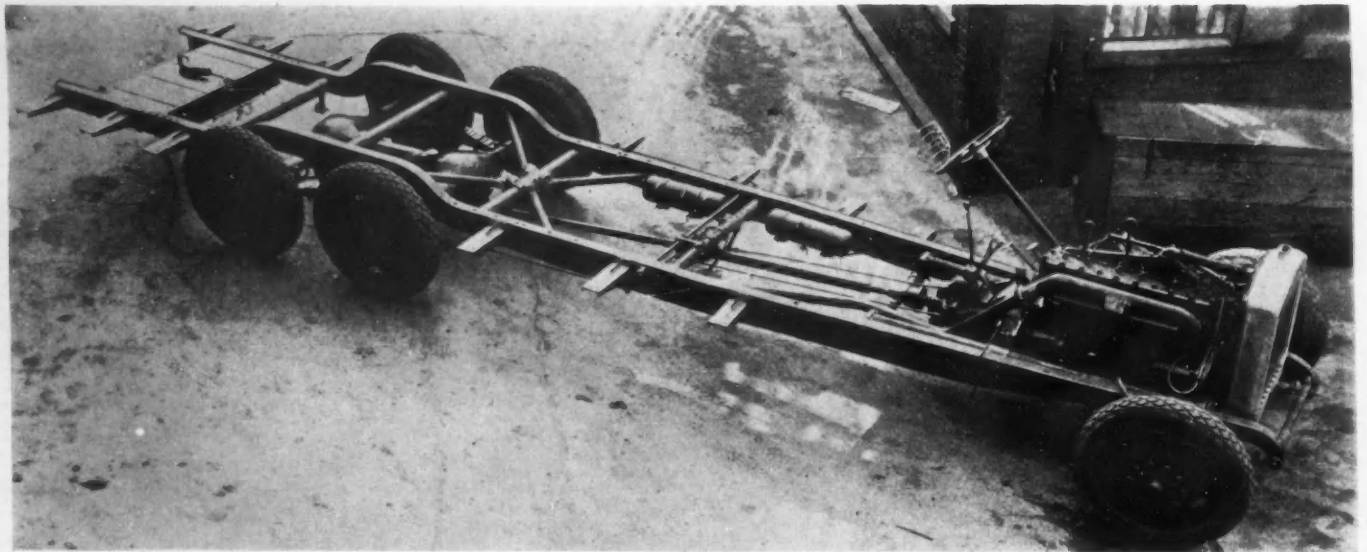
CHASSIS DESIGN USED CONSIDERABLY UNDER MOTORCOACHES
